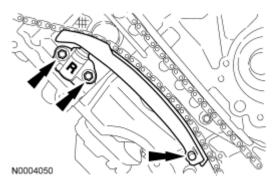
Positioning RH Timing Chain Tensioner Arm On Dowel Pin Courtesy of FORD MOTOR CO.
